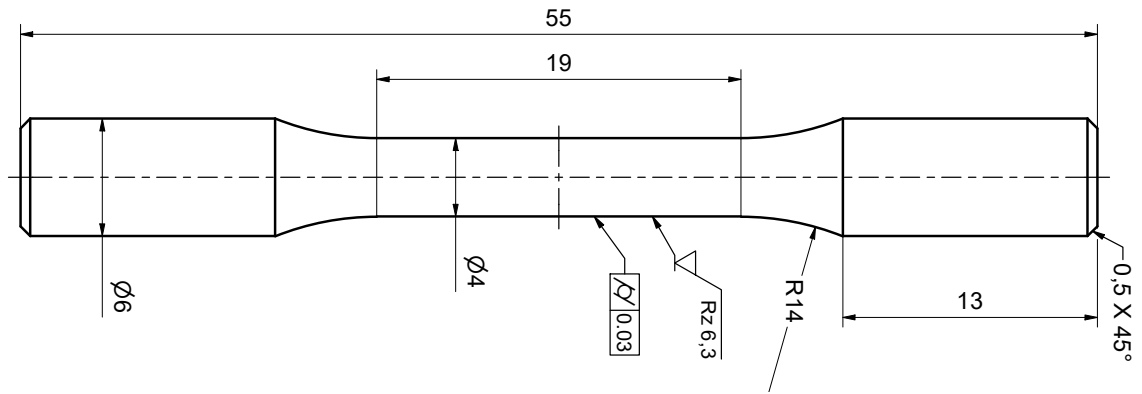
Technical drawing of fatigue test specimen for strain-controlled experiments.
